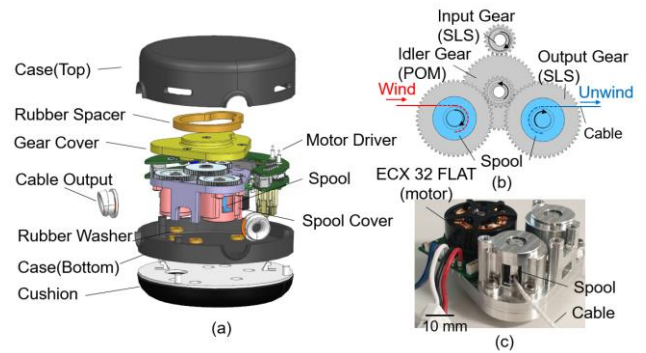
Bi-directional actuation module: (a) Exploded view, (b) Gear train, (c) Cable-driven actuator
